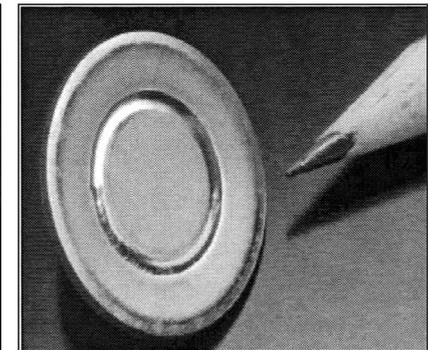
Heat-conduction welding of a stainless steel coin (600 W, 1,5 mm thick, 200 mm/min)
